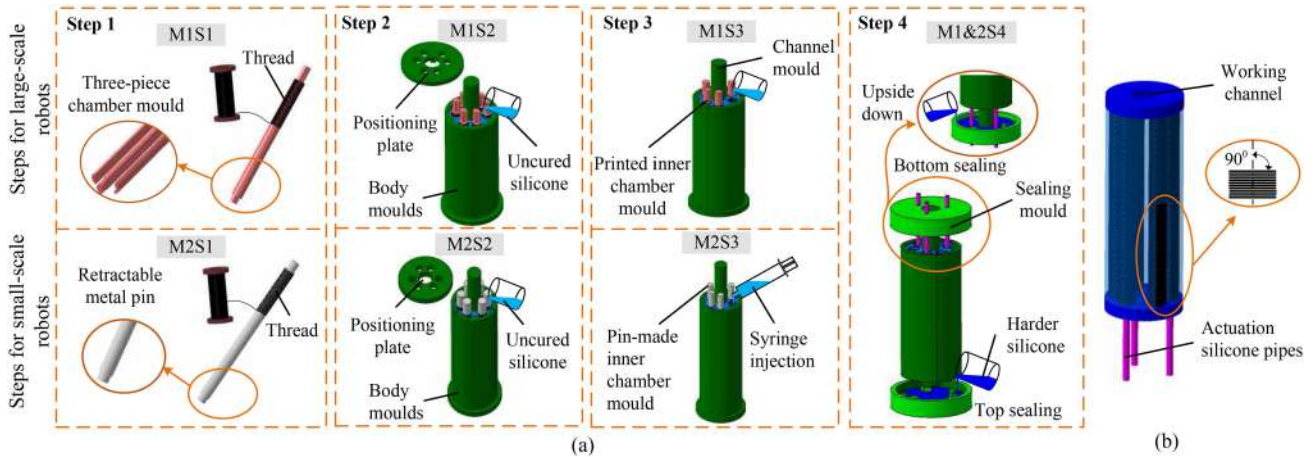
(a) Two Fabrication paradigms M1 and M2, for fabricating large-scale robots (diameter  $\geq 15$  mm) and small-scale robots (diameter  $< 15$  mm), respectively. Step 1: densely weaving the thread to printed three-piece chamber moulds (M1S1) or retractable pins (M2S1); step 2: pouring the silicone to assembled moulds to make the main body of robots (M1S2 and M2S2); step 3: fabricating the inner layer of the chambers via pouring silicone (M1S3) or syringe injection (M2S3); step 4: sealing the top and bottom of robots (M1&2S4). (b) Structure details of the robots with densely reinforced chambers.
